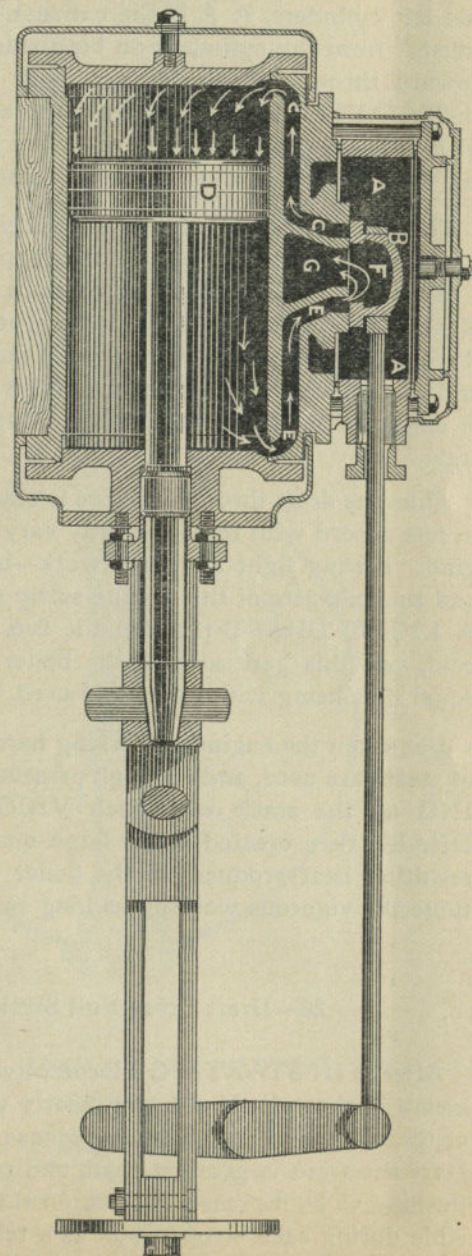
SECTIONAL VIEW THROUGH STEAM-CHEST AND CYLINDER.
